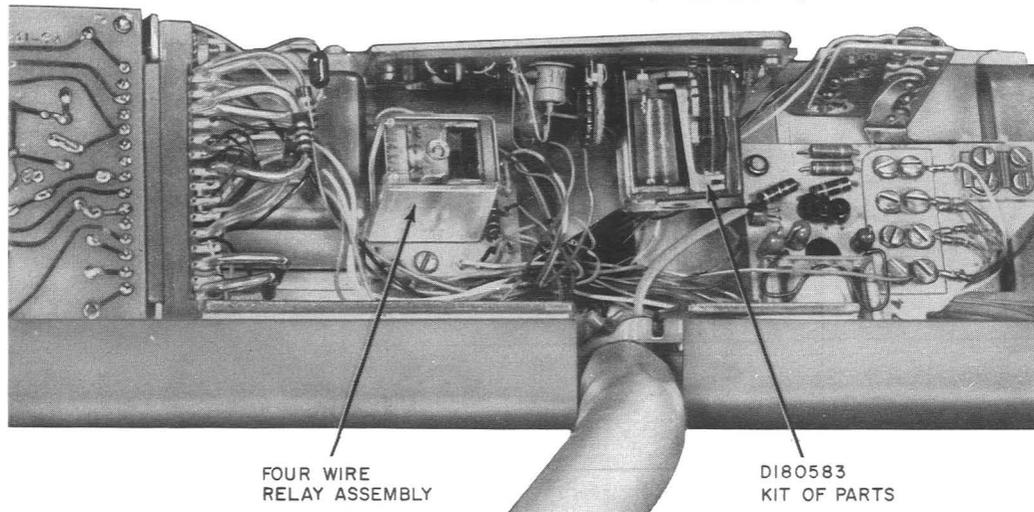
Addition of Time Flash Unit (D180583 Kit of Parts) to 120-Type Supervisory Console
